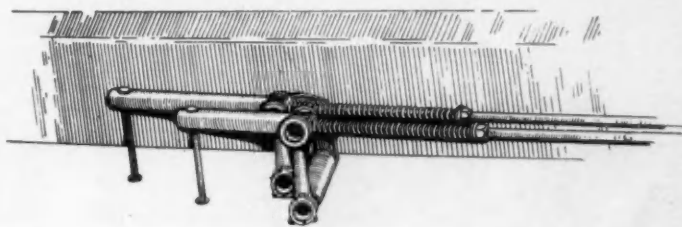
OUTSIDE BRAKE ADJUSTMENT
